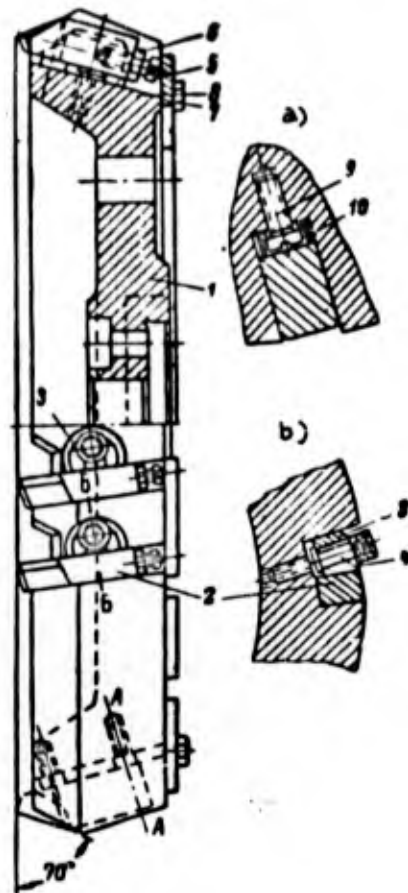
End Milling Cutter With Precision Setting of Teeth in the Body
